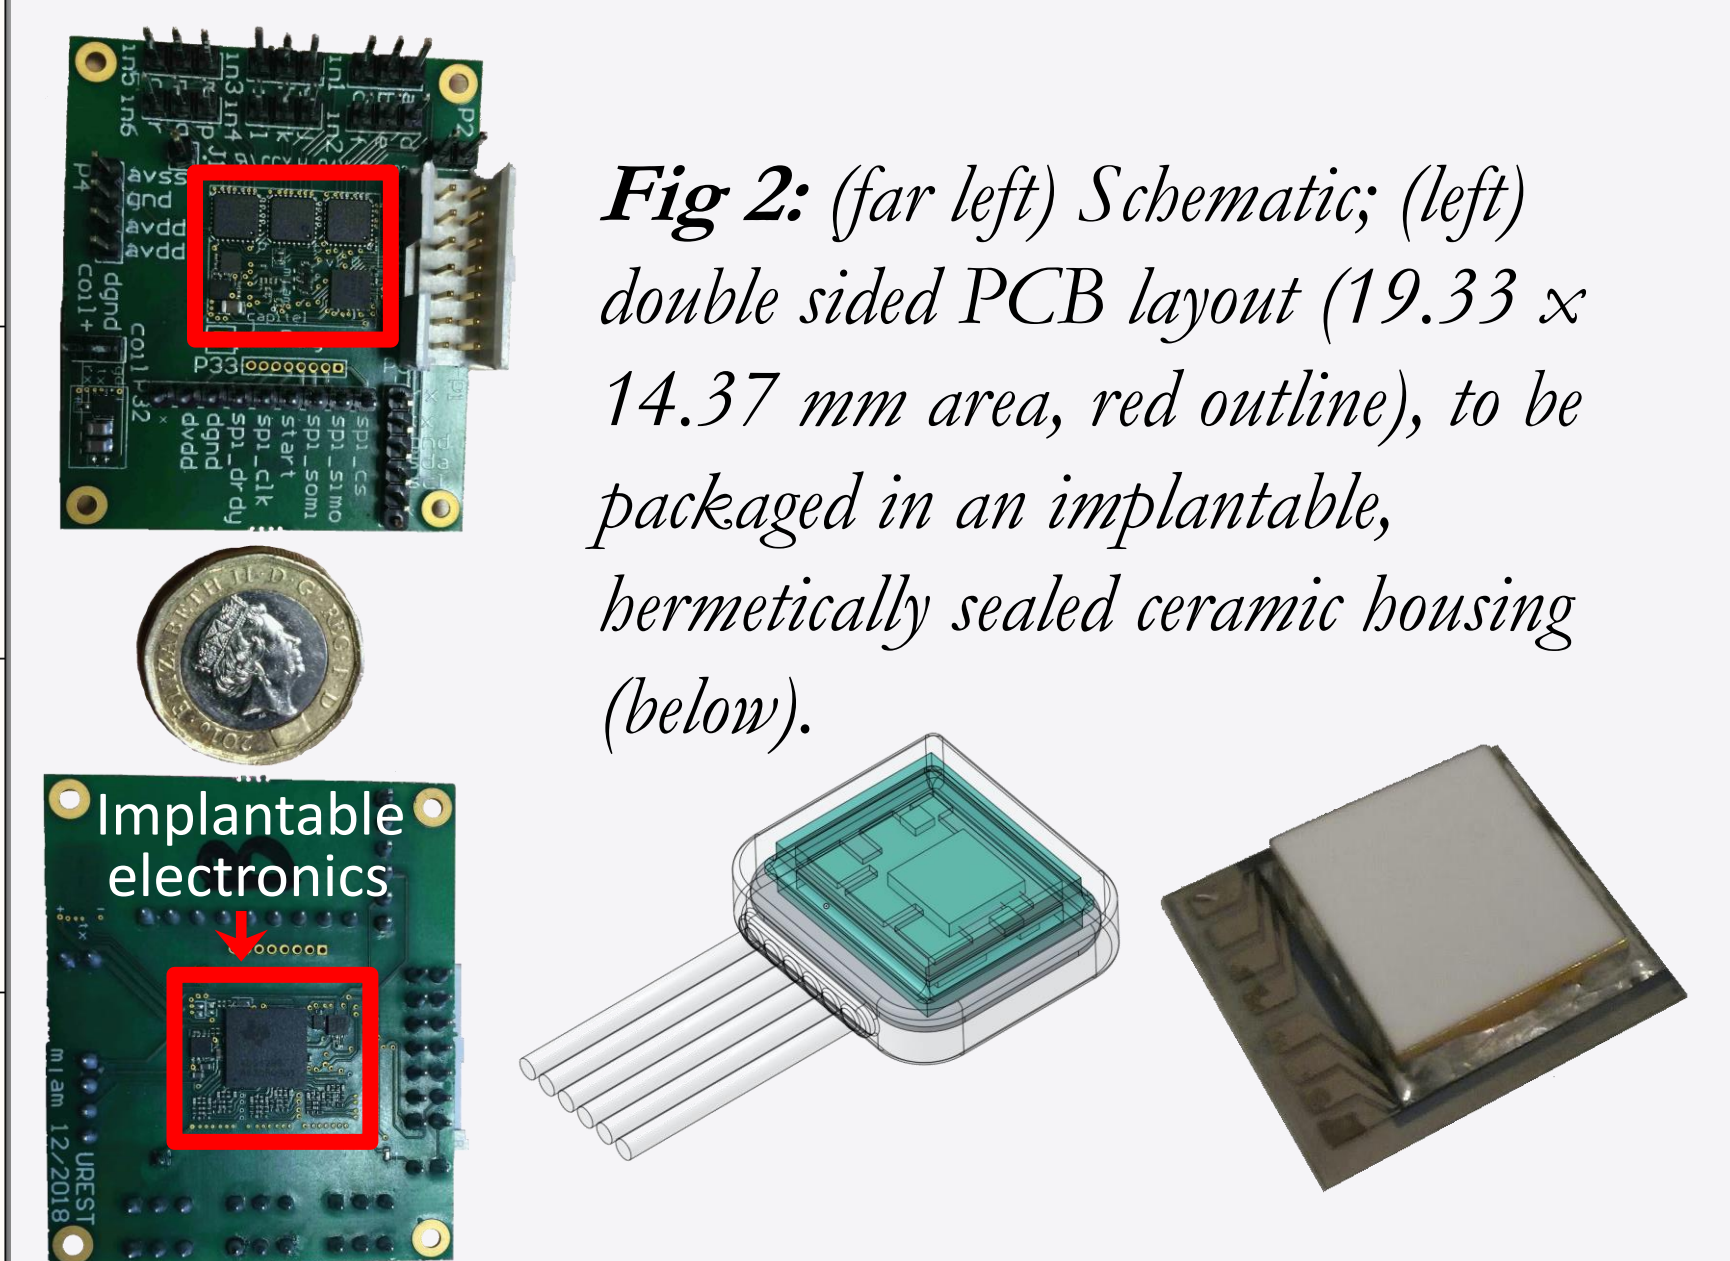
(far left) Schematic; (left) double sided PCB layout ( $19.33 \times 14.37 \text{ mm}$  area, red outline), to be packaged in an implantable, hermetically sealed ceramic housing (below).
